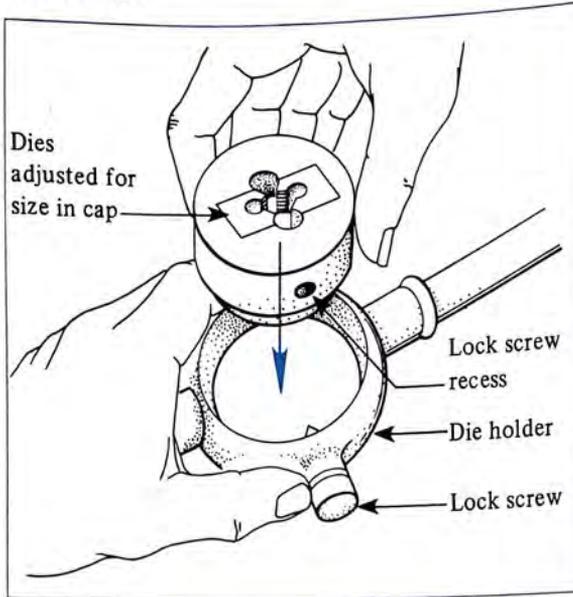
Assembling a Two-Jaw Adjustable Threading Die
